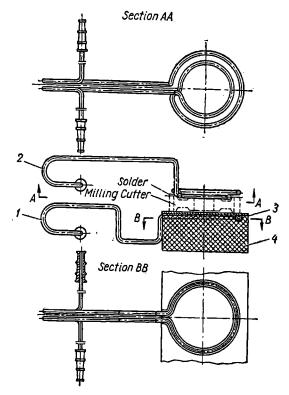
Device for simultaneous brazing of multi-blade milling cutters with carbide tips on induced heat apparatus
